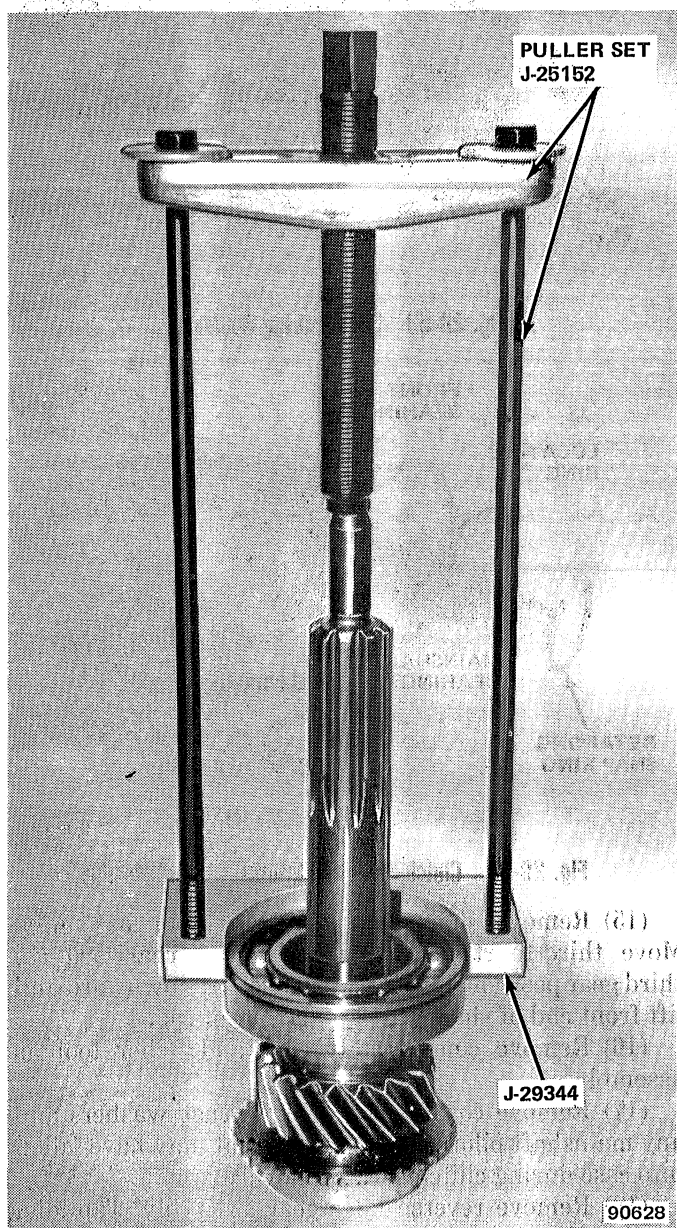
B-56 Removing Front Bearing from Clutch Shaft
